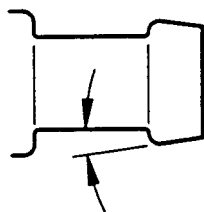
HOSE ASSEMBLY—LEAD END DIAMETER OF FITTING
